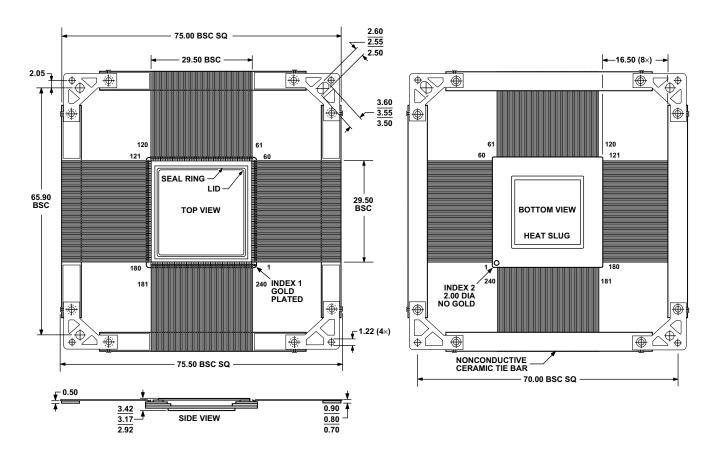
240-Lead Ceramic Quad Flat Package, Mounted with Cavity Up [CQFP]
